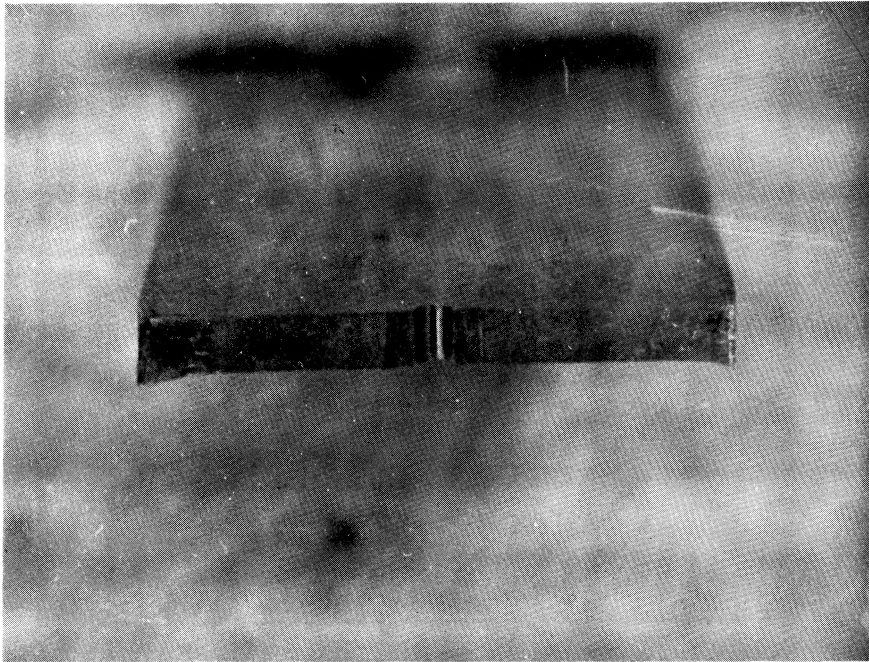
Fracture surface of martensite crack growth specimen 6-49.
